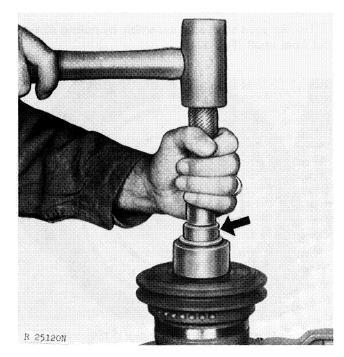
Installing Pulley and Bearing with KD-2017A and B Tool
